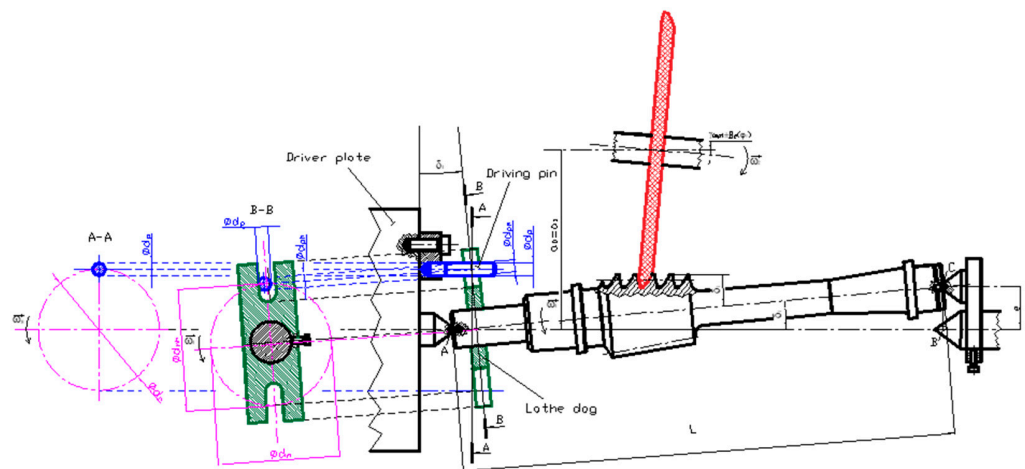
The overall grinding manufacturing process of the spiroid worm shaft.
